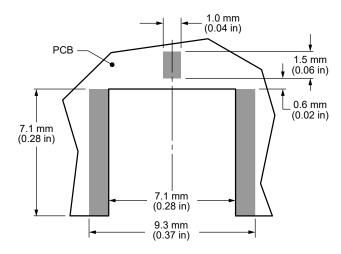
Recommended PCB Footprint for the CONREVSMA024-G Connector
